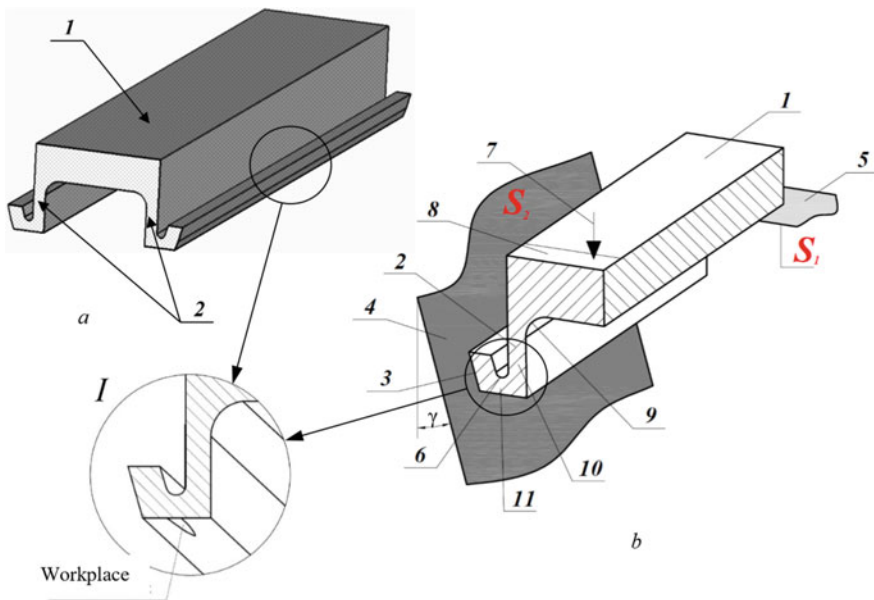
Prismatic sample (a) and its design features (b) (the view of the quarter of the sample) 1 prismatic body, 2 L-shaped projections, 3 support bevels, 4 inclined support surface of prismatic support S_1 , 5 bearing surface of the end surface S_2 , 6 hollow chamfer, 7 test force, 8 loading surface, 9 internal radial transition, 10 vertical bar of the L-shaped projection, 11 horizontal bar of the L-shaped projection, γ —angle of the slope of support surface S_1 , *I*—area of the working zone of the sample
